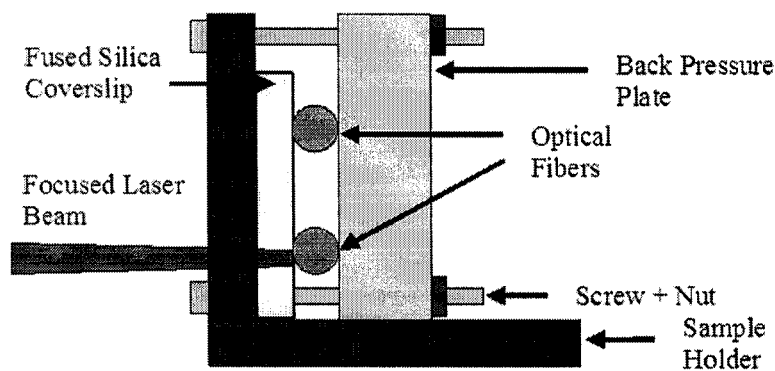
Laser welding arrangement showing a fused silica coverslip and two optical fibers pressed in contact by the sample holder and back pressure plate.
